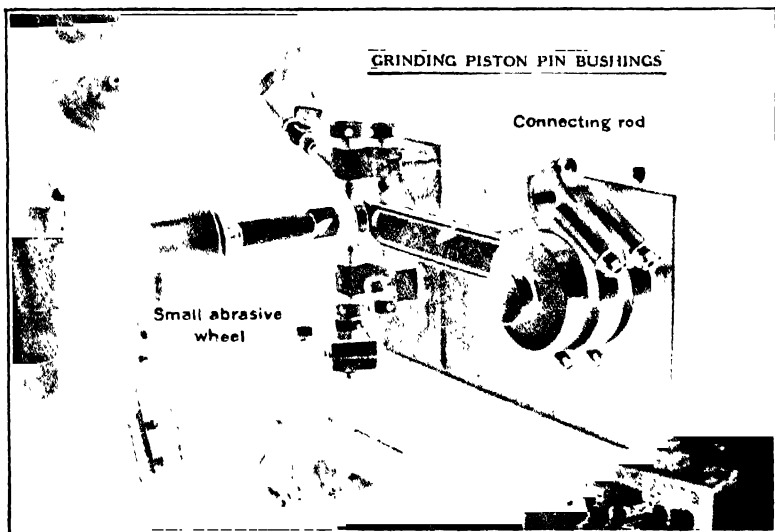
Jig for Supporting Curtiss D12 Master Rod when Grinding Piston Pin Bushing.
